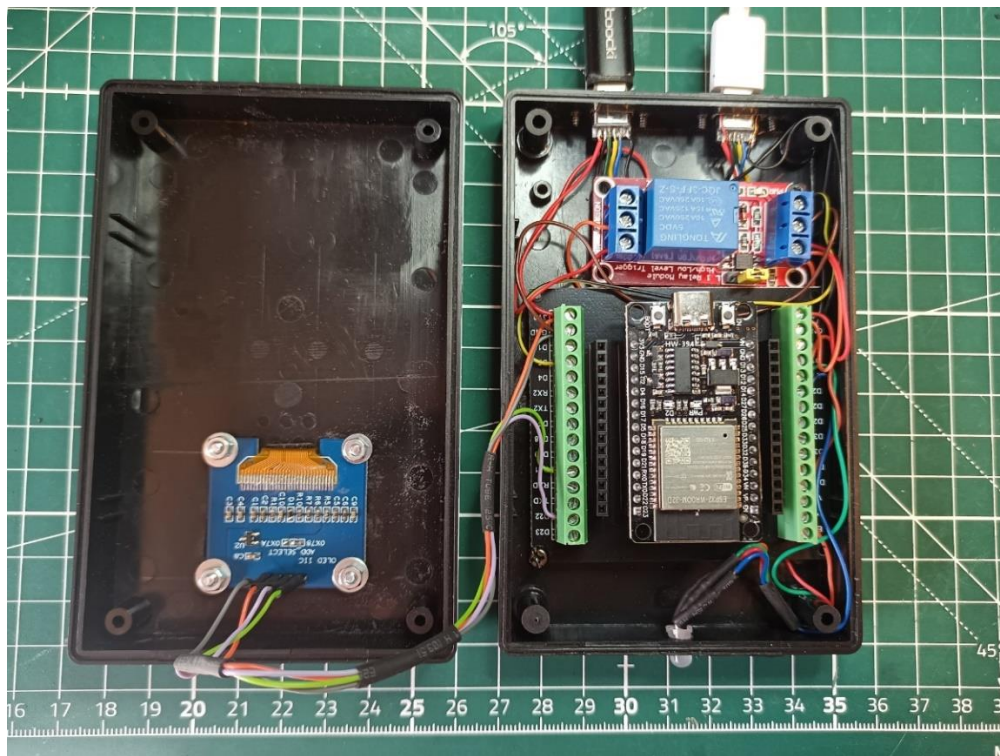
Mounting the ESP, Relay Board, and OLED Display
